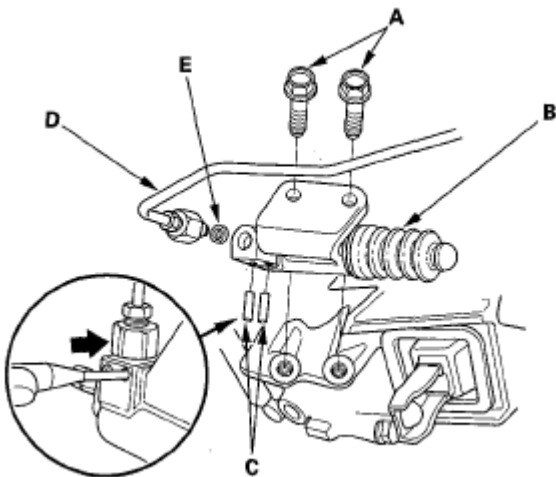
Identifying Mounting Bolts And Slave Cylinder
